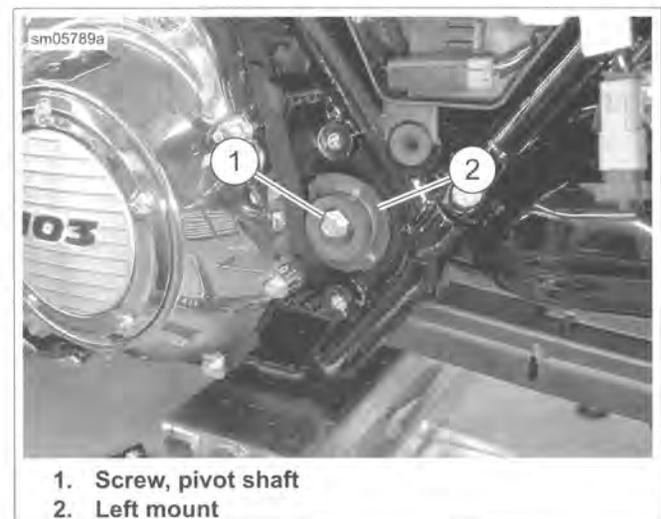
Left Side Mount and Pivot Shaft Assembly
